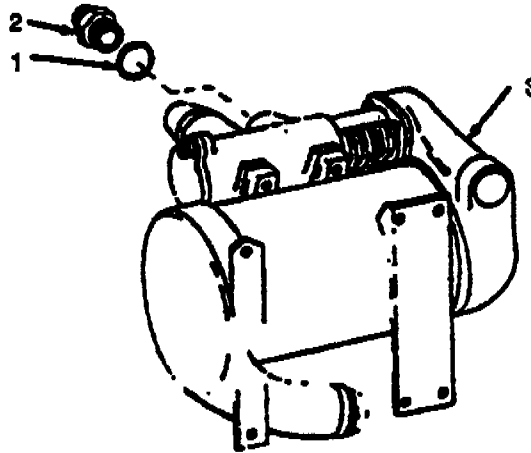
Fuel Heater Assembly (T53-L-15, -701, -701A)
